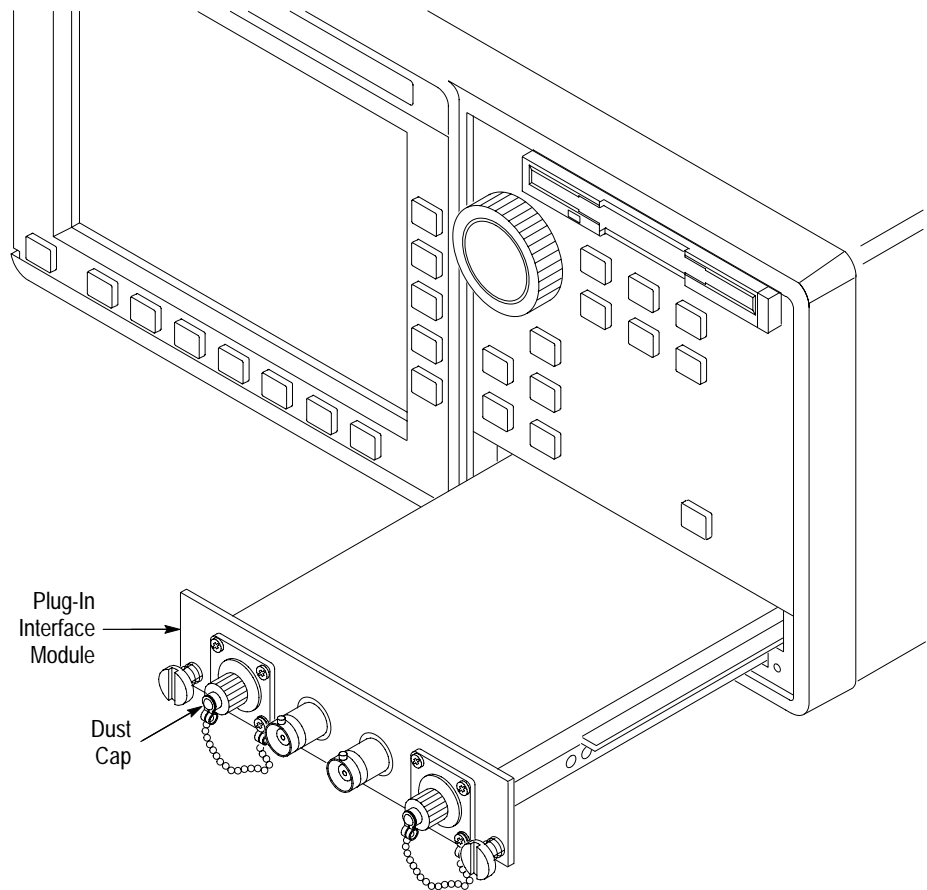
Cabinet and Front-Panel Mounted Modules
